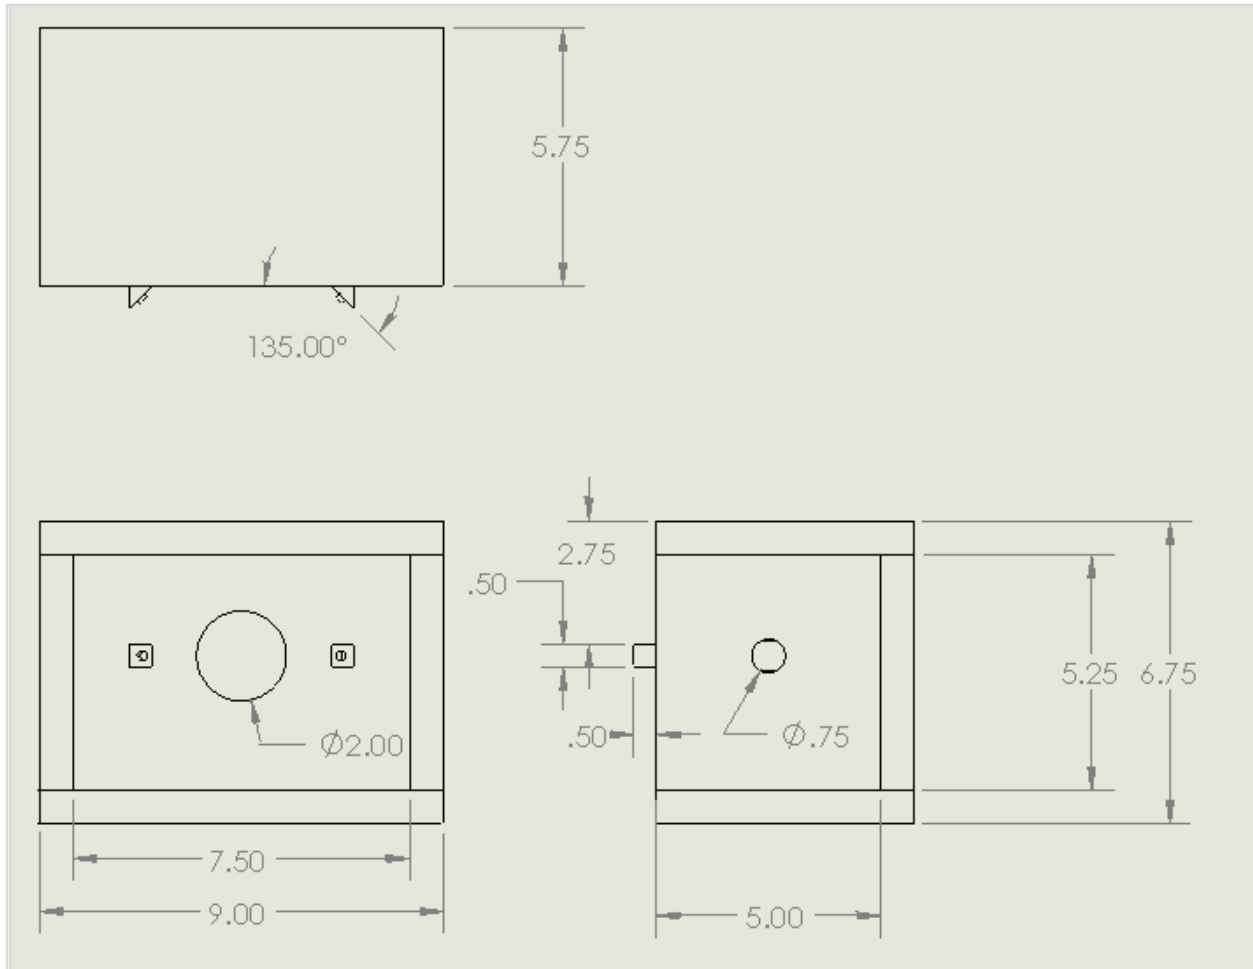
Electronics Bay detail with dimensions. The electronics bay is primarily composed of 0.75" thick Foamular insulation. All dimensions in inches.
